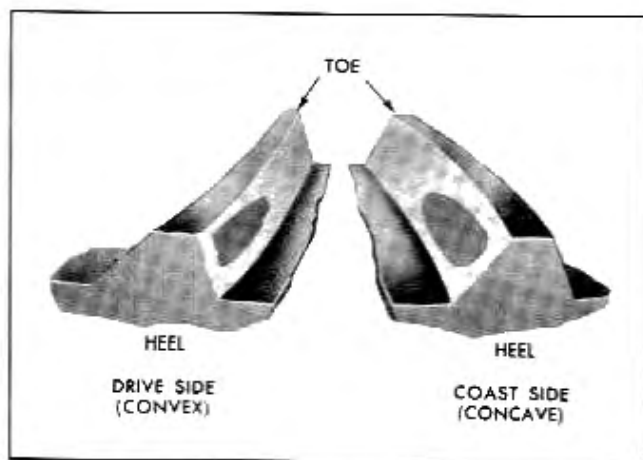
Tooth Pattern When Backlash is Excessive
